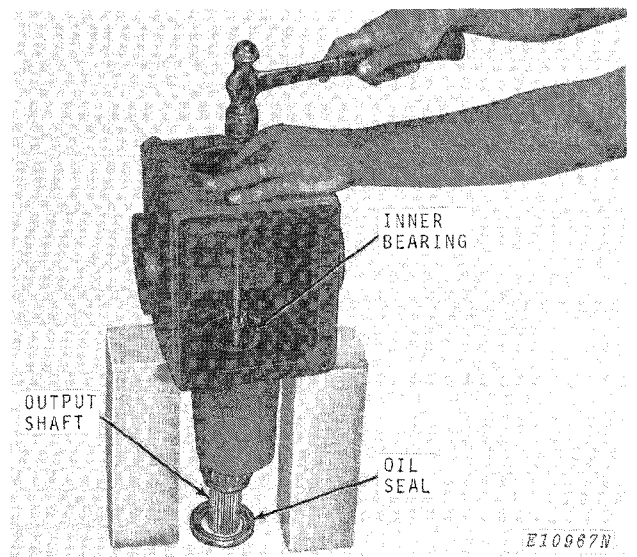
Removing Output Shaft Assembly, Oil Seal, and Inner Bearing
